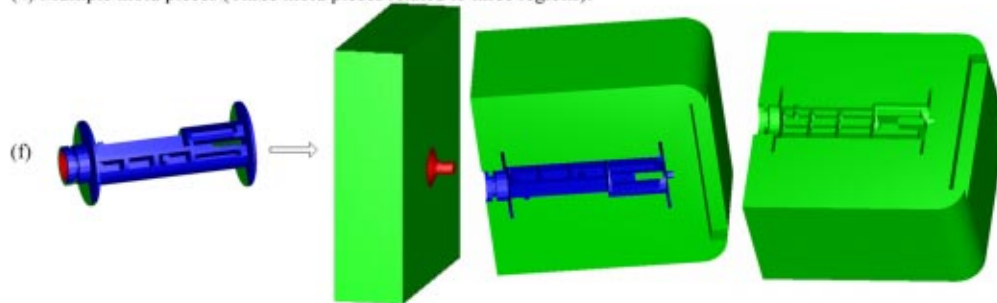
Results of tested industrial parts (part regions with constructed molds)
